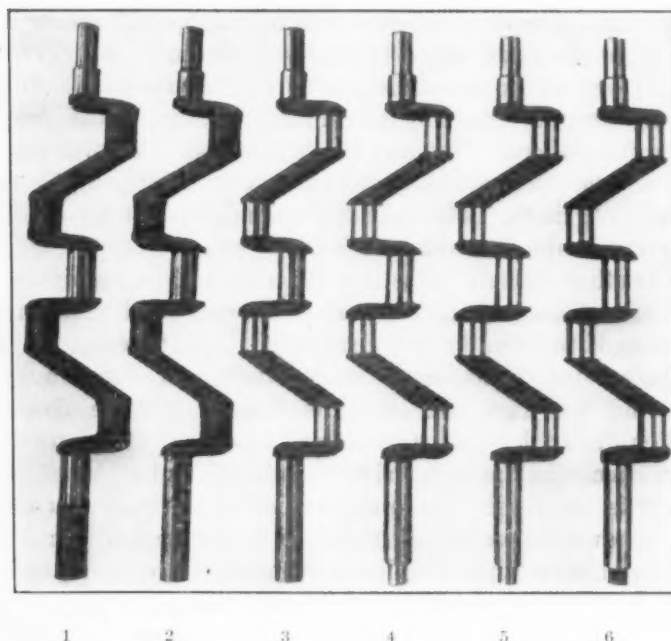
EXAMPLES OF INEXPENSIVE DESIGN
